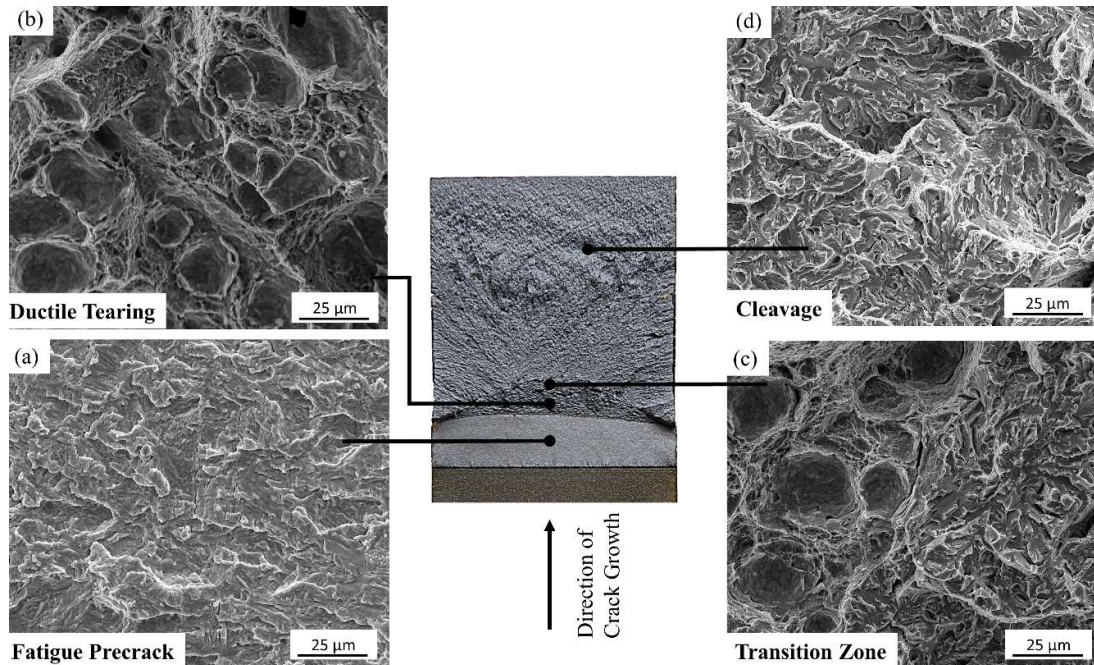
Typical fracture modes observed on the fracture surface of 100-O specimen quenched in aqueous polymer and tempered at 590°C: (a) Fatigue precrack, (b) Ductile tearing zone, (c) Ductile-Cleavage transition zone and (d) cleavage zone.
